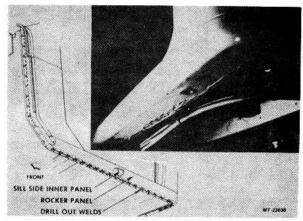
Rocker Panel to Sill-Side Inner Panel Spot Welds
